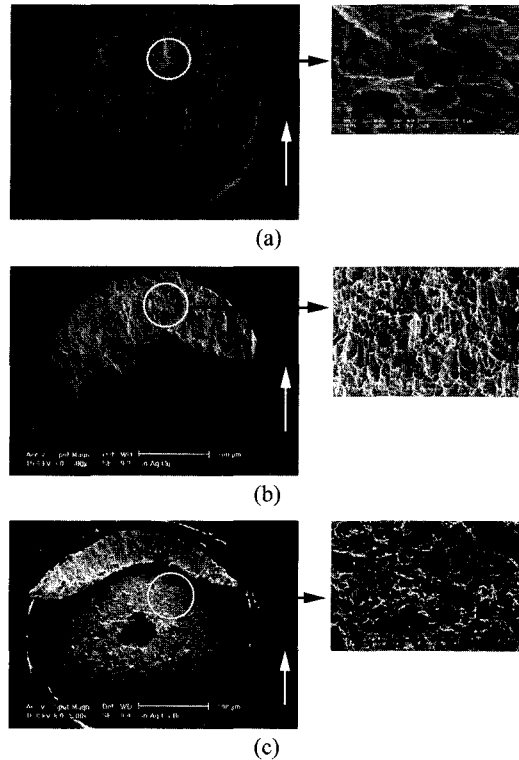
Fracture surface of solder ball before aging (a) Sn-37Pb (b) Sn-3.5Ag-0.75Cu (c) Sn-2.0Ag-0.7Cu-3.0Bi.
